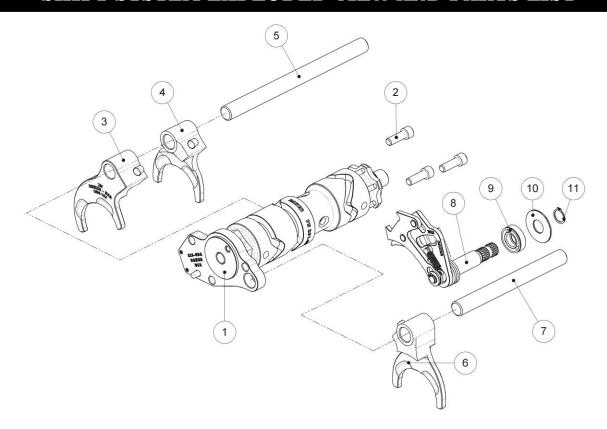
| EXPLODED VIEW, SHIFT SYSTEM
